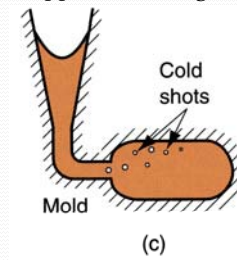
Some common defects in castings: (c) cold shot
